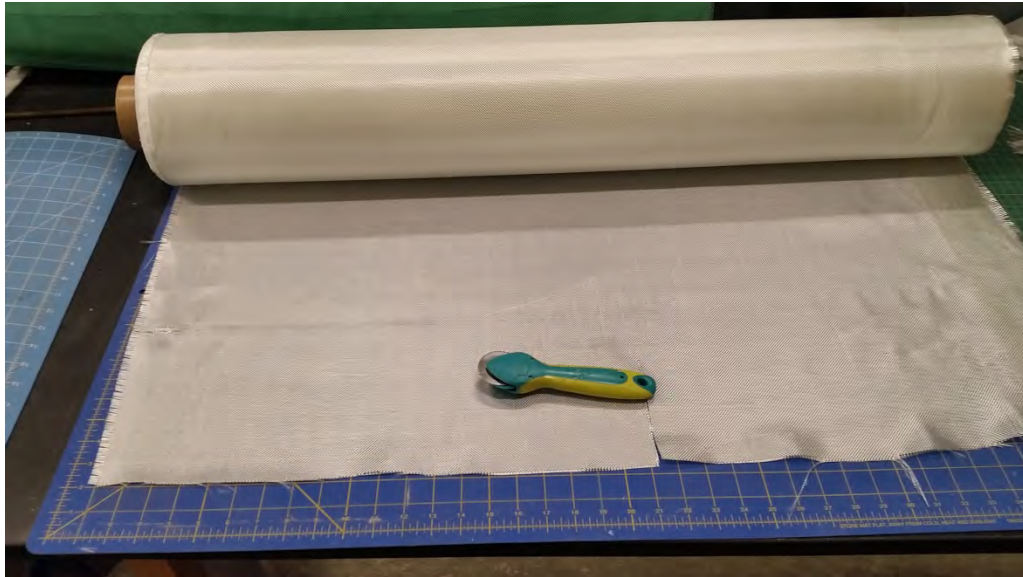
Cutting Wheel Used to Cut Woven E-Glass Sheet.
